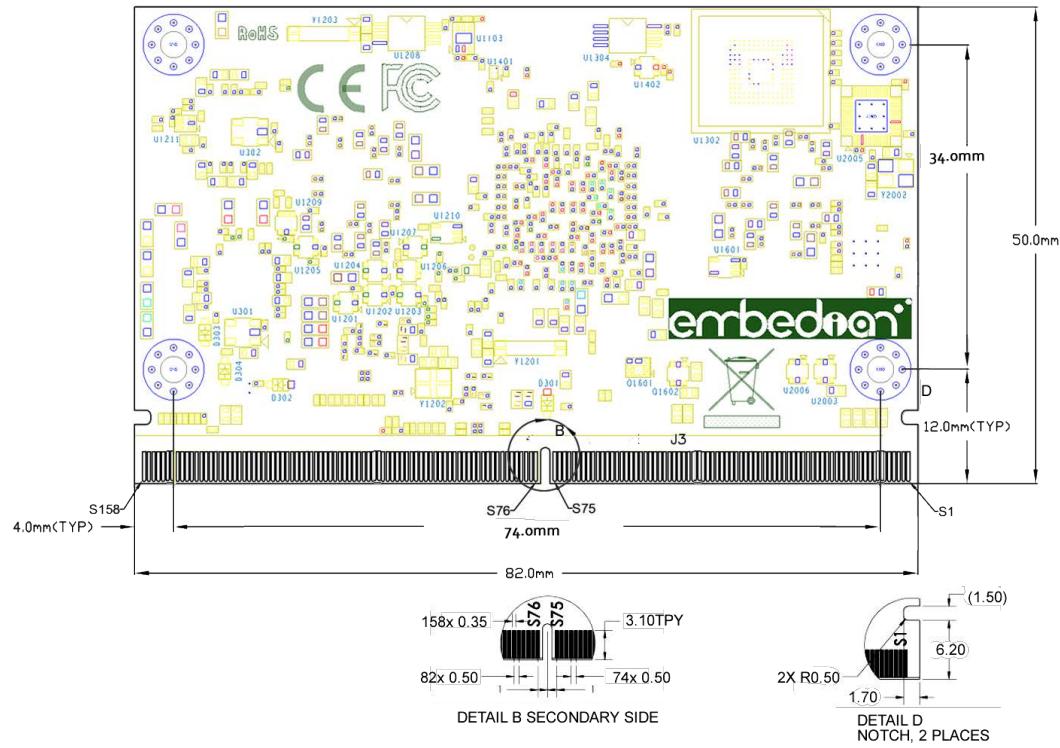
SMARC-iMX8 Mechanical Drawings (Bottom View)
